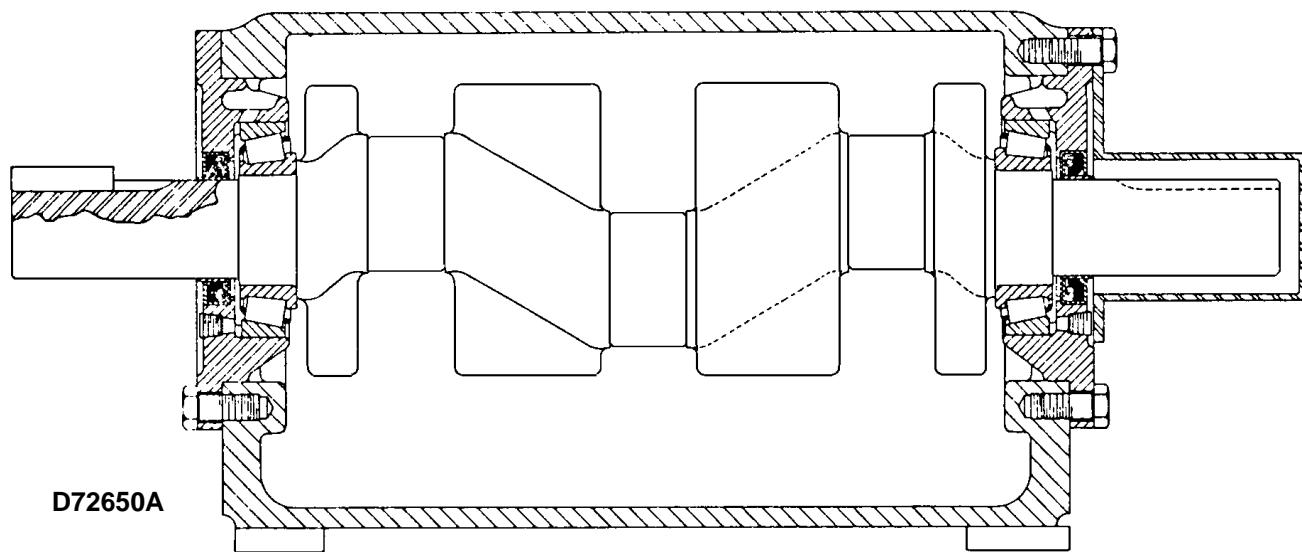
REAR SECTIONAL VIEW OF TRIPLEX POWER END SHOWING CRANKSHAFT
